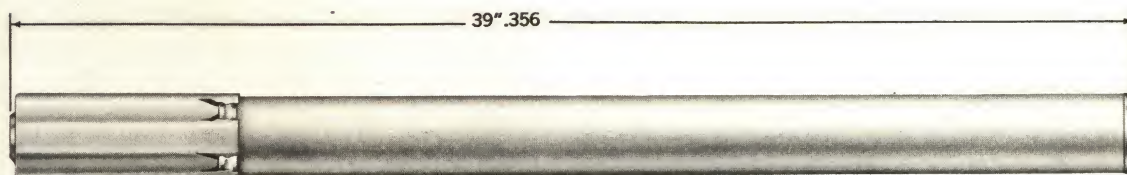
2.75-Inch Rocket Motor Mk 4 Mod 0, External View.
